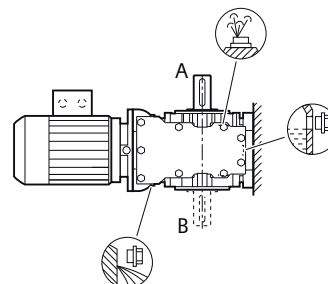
Mounting positions for helical worm gearbox C. foot-mounted design, size 39A
